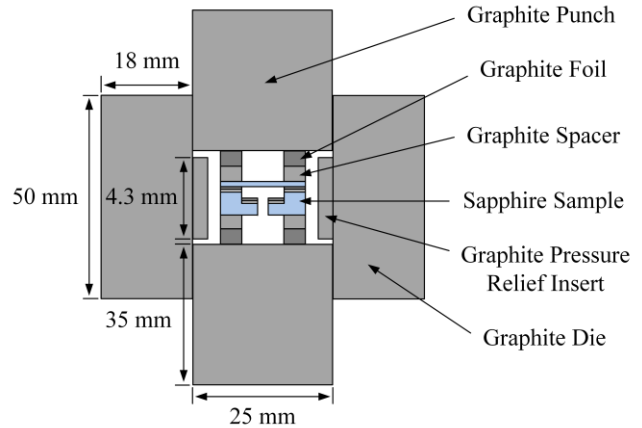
Schematic of the assembly that was inserted into the SPS press for thermocompression bonding.
